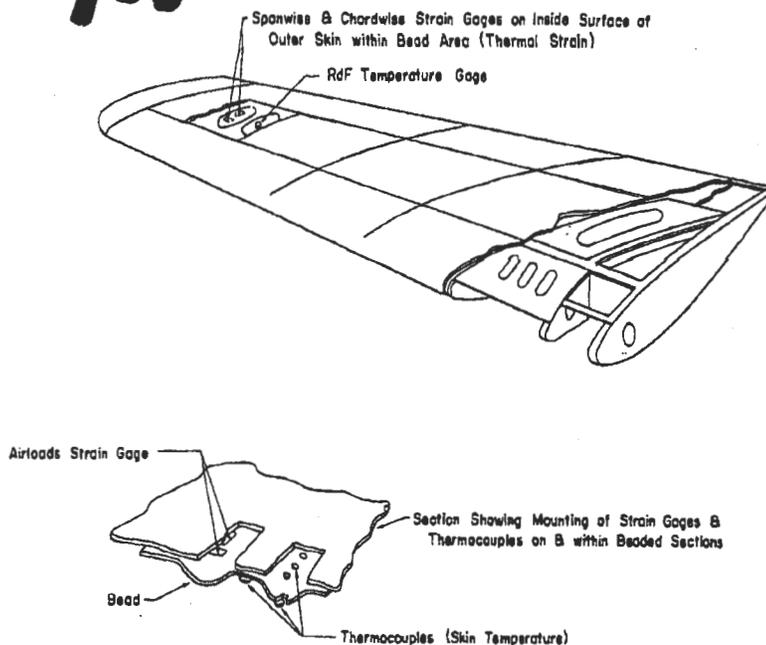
Typical elevator section, showing strain gage and thermocouple installations.
